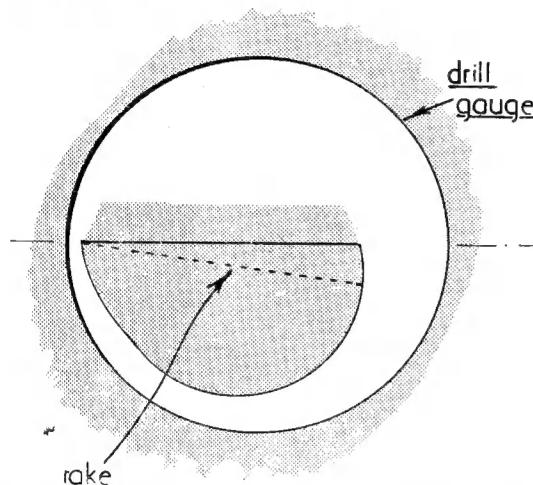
Checking the clearance below the cutting edge in the drill gauge
